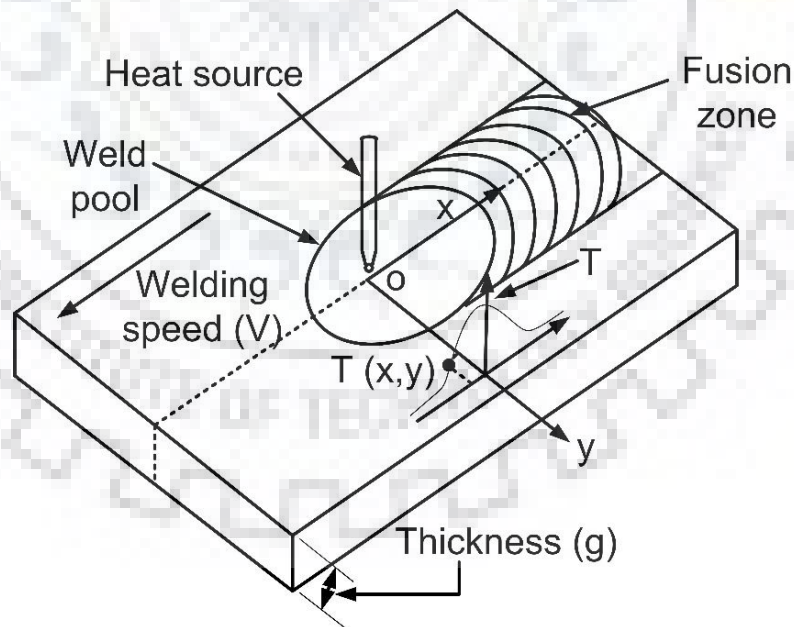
Two-dimensional heat flow during welding of thin sheets (Kou, 2002)
